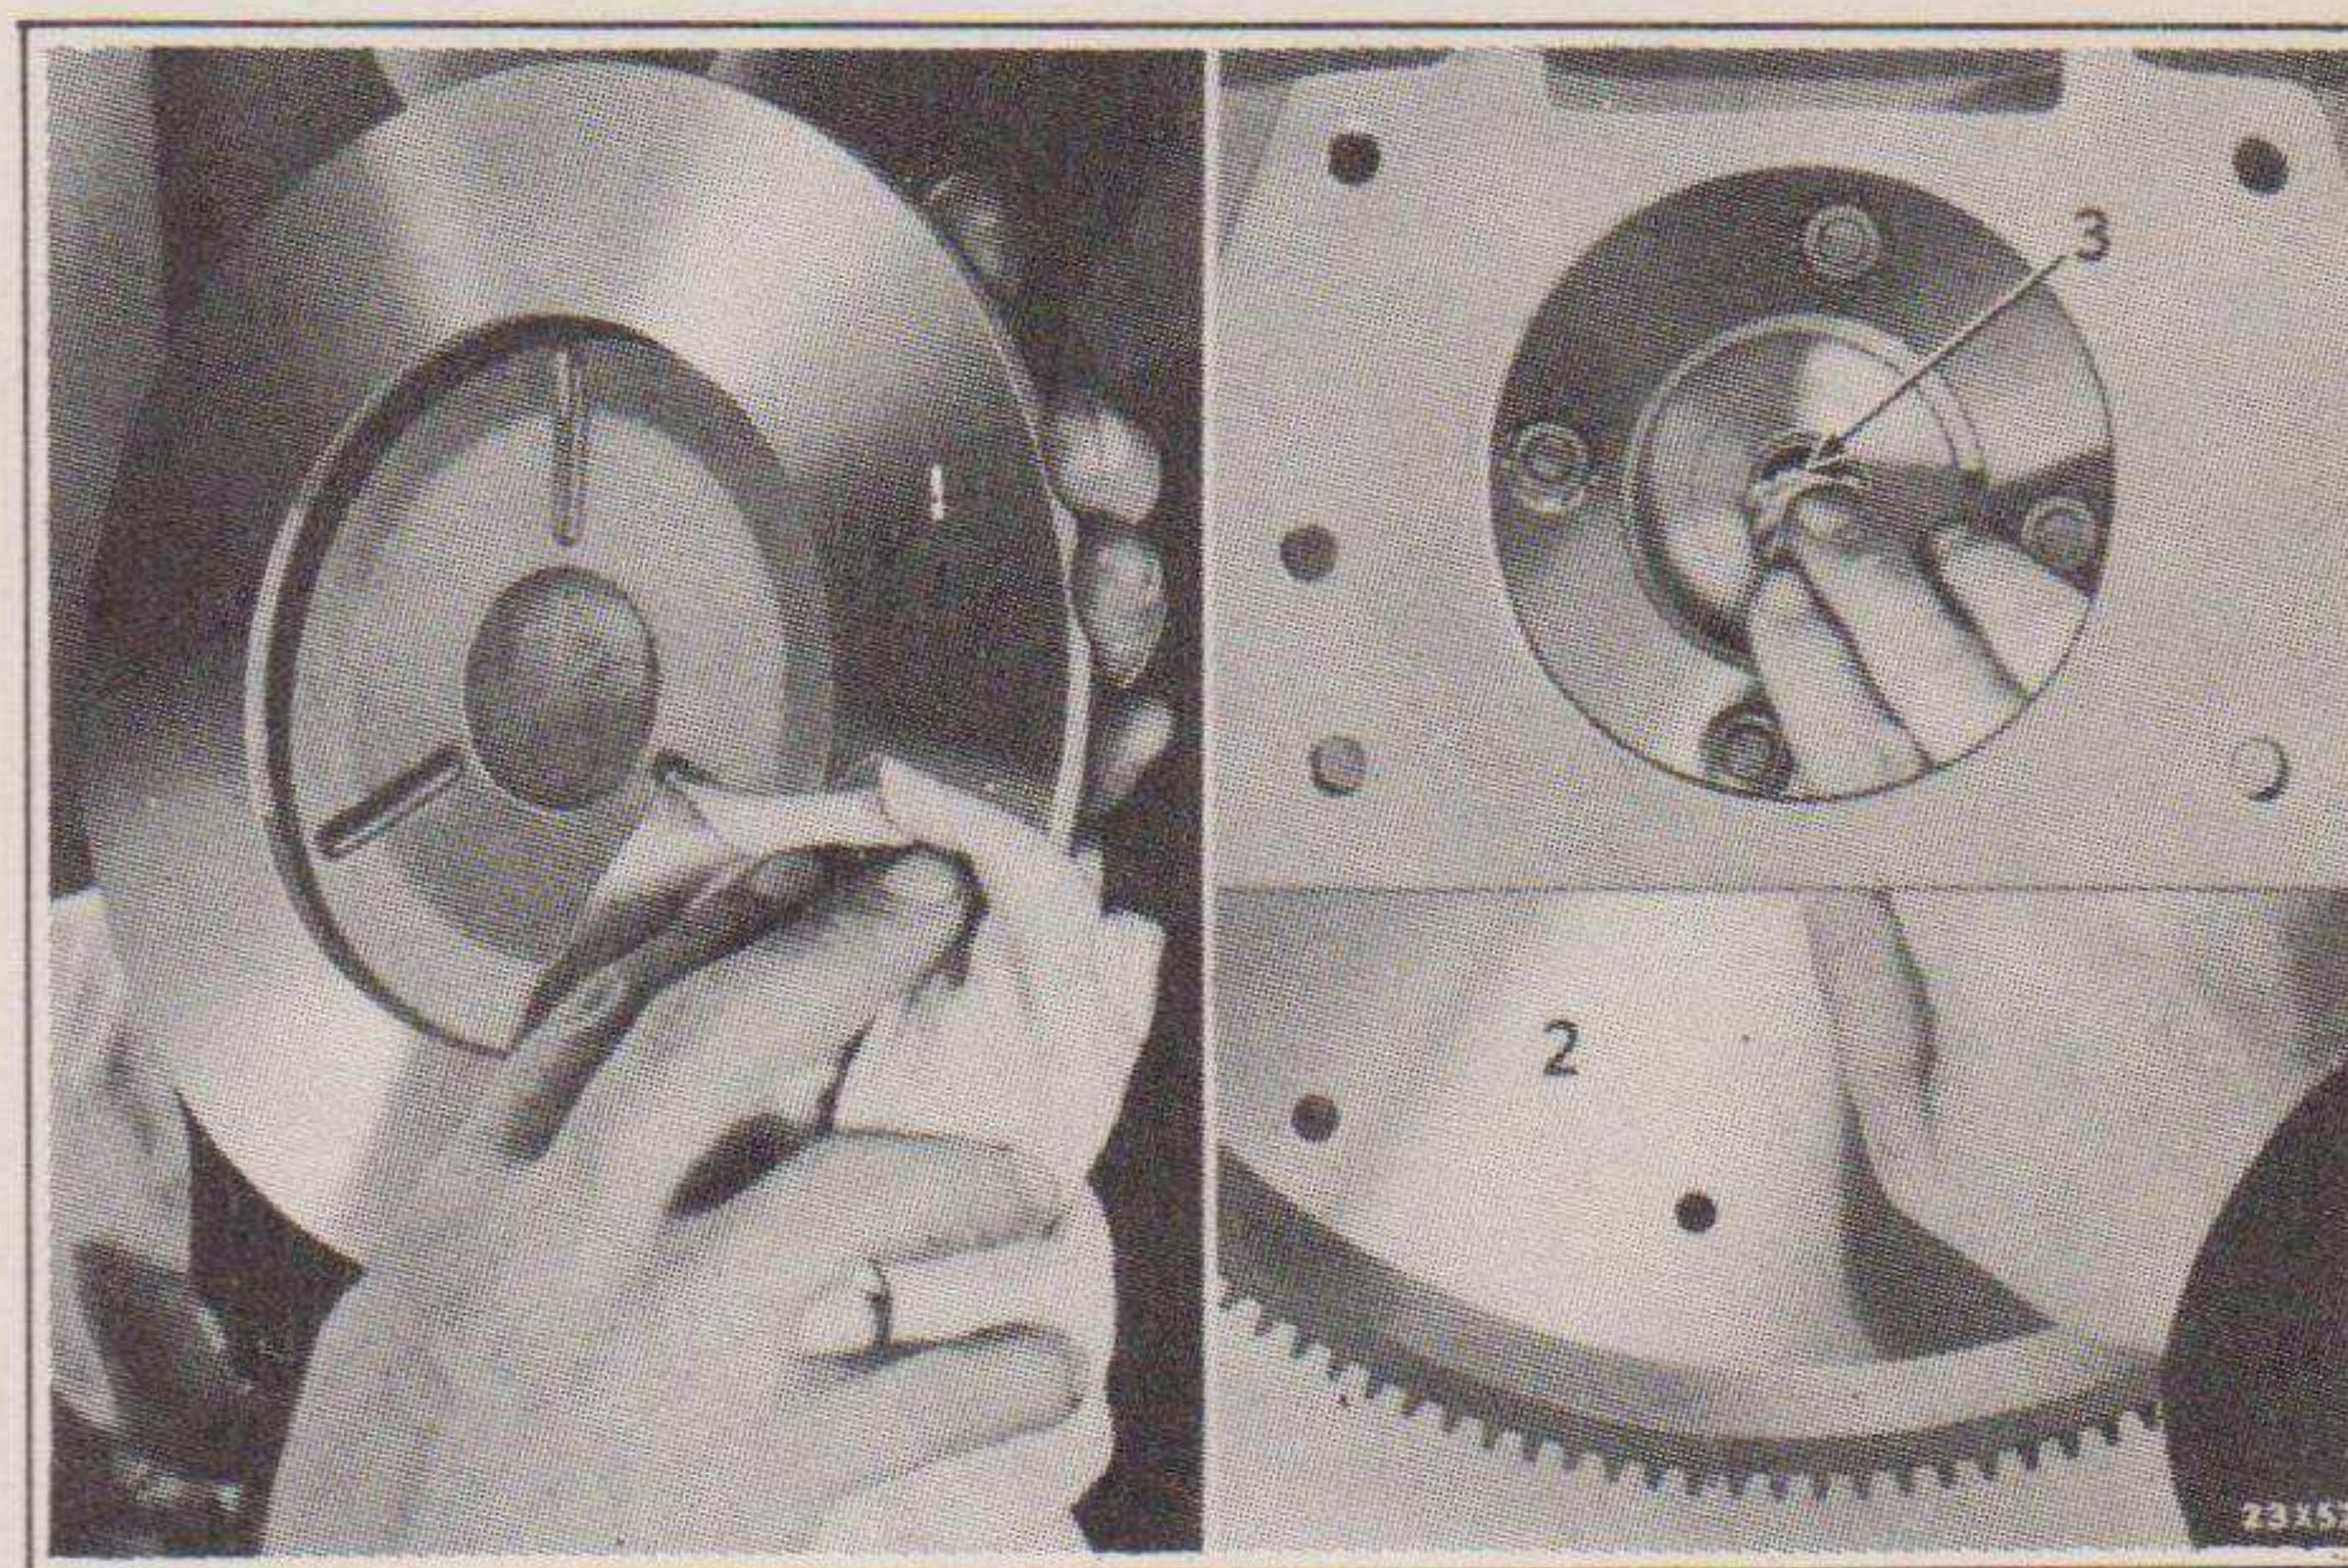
Cleaning Clutch Friction Surfaces and Lubricating Pilot Bushing
